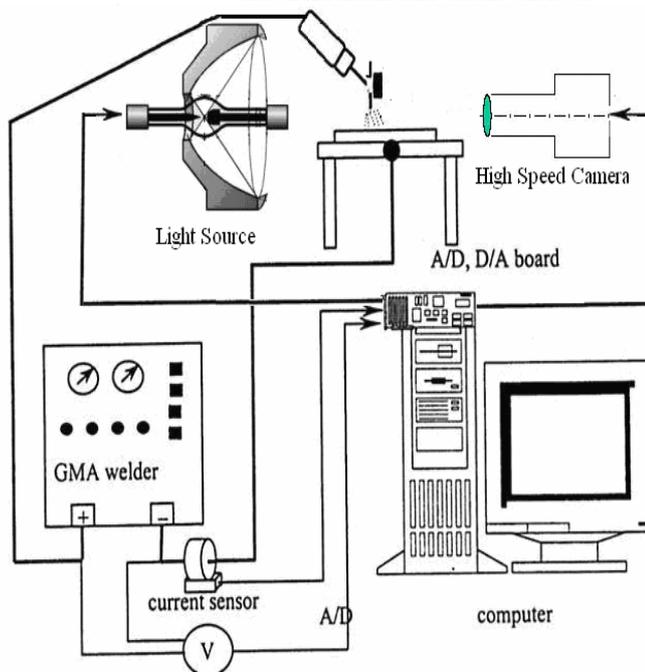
P- GAS METAL ARC WELDING PROCESS
